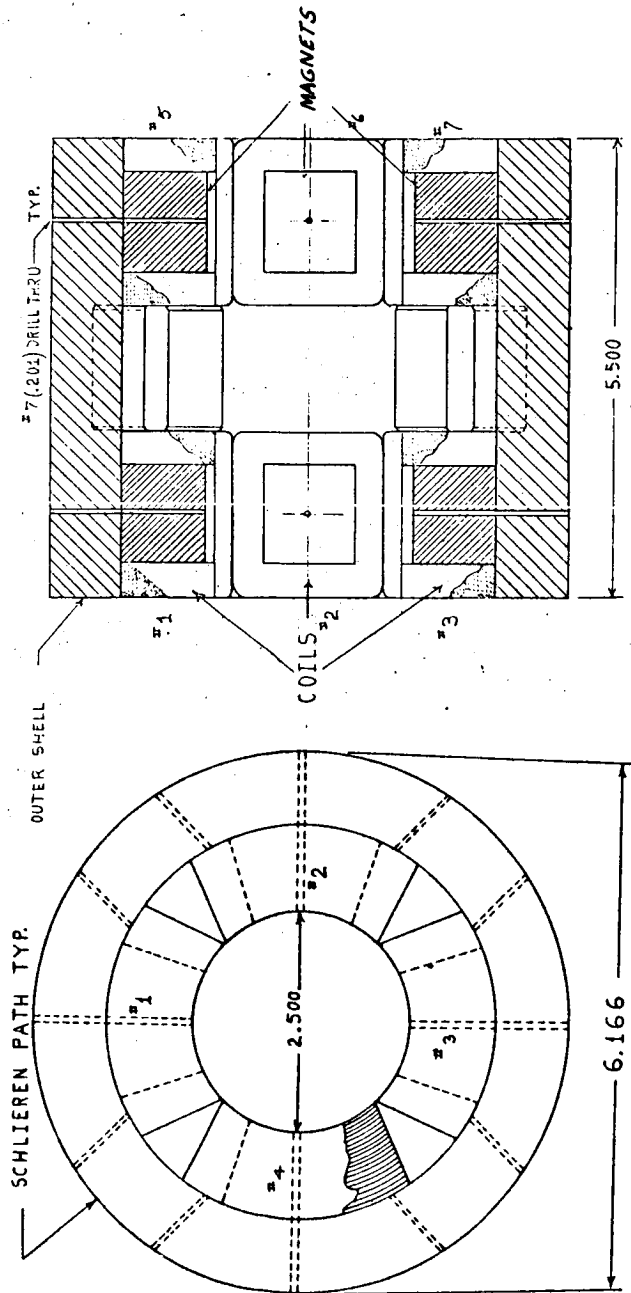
Assembly of scale cylindrical magnetic balance and suspension arrangement
